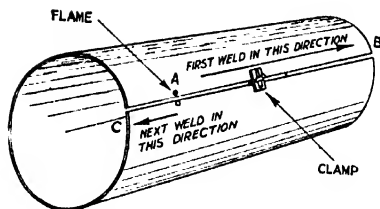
METHOD OF WELDING A LONG SEAM IN COPPER (*The British Oxygen Co., Ltd.*)
